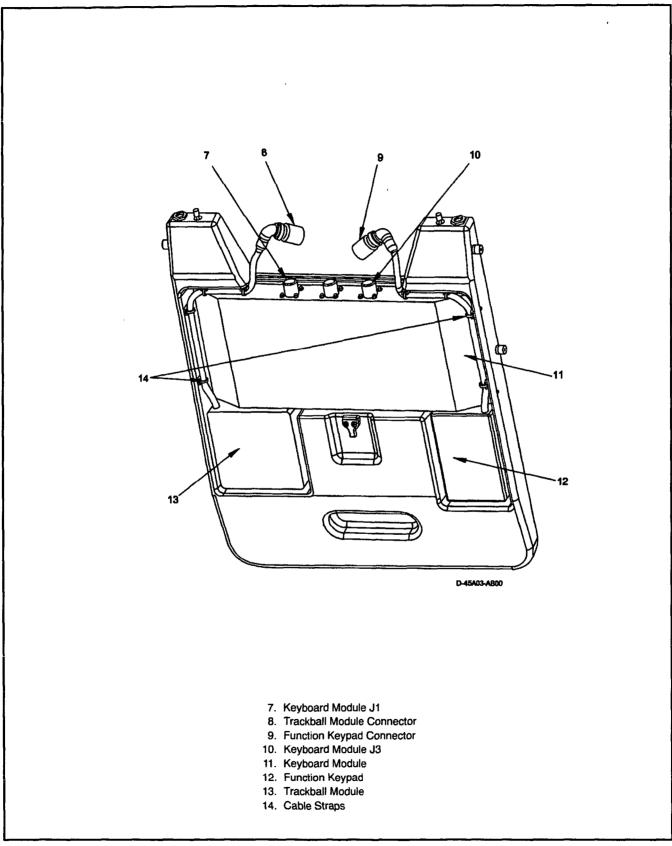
Keyboard-Trackball Assembly CA-103/ASQ-225 (Bullnose) and Control Indicator Set AN/ASQ-225 Components (Sheet 2)
